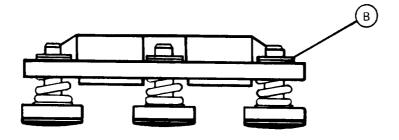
Actuator Assembly Adjustment Points (Type A)
